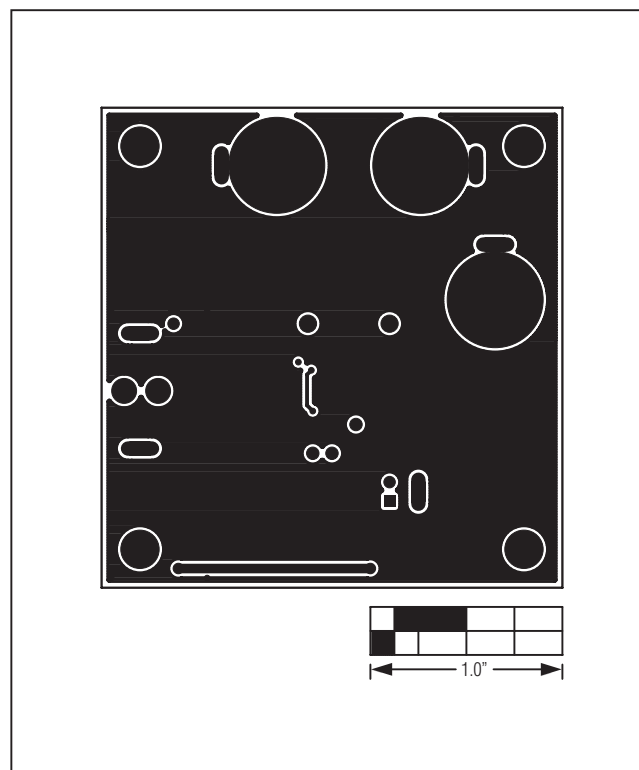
MAX98307 EV Kit PCB Layout—Solder Side
